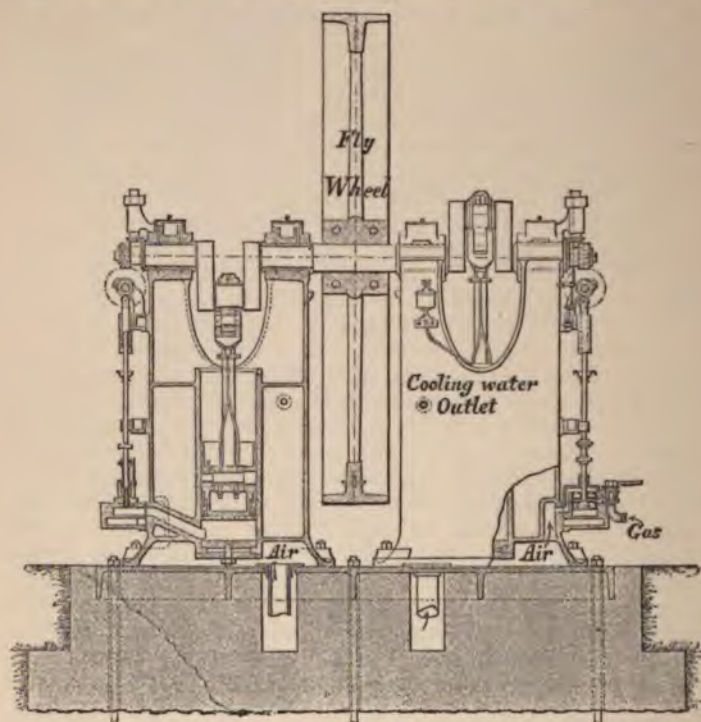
Adam Twin-Cylinder Engine—Side Elevation.
